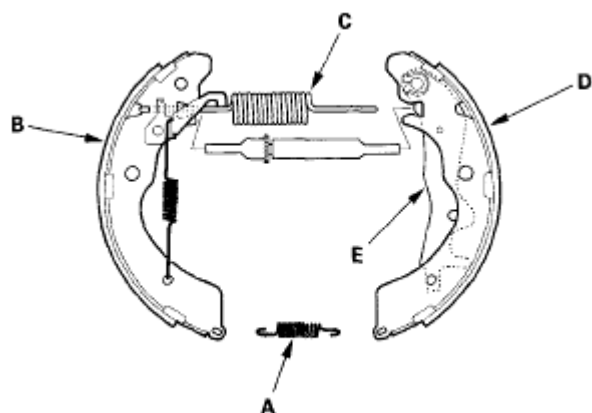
Identifying Brake Shoe Assembly Over Hub
